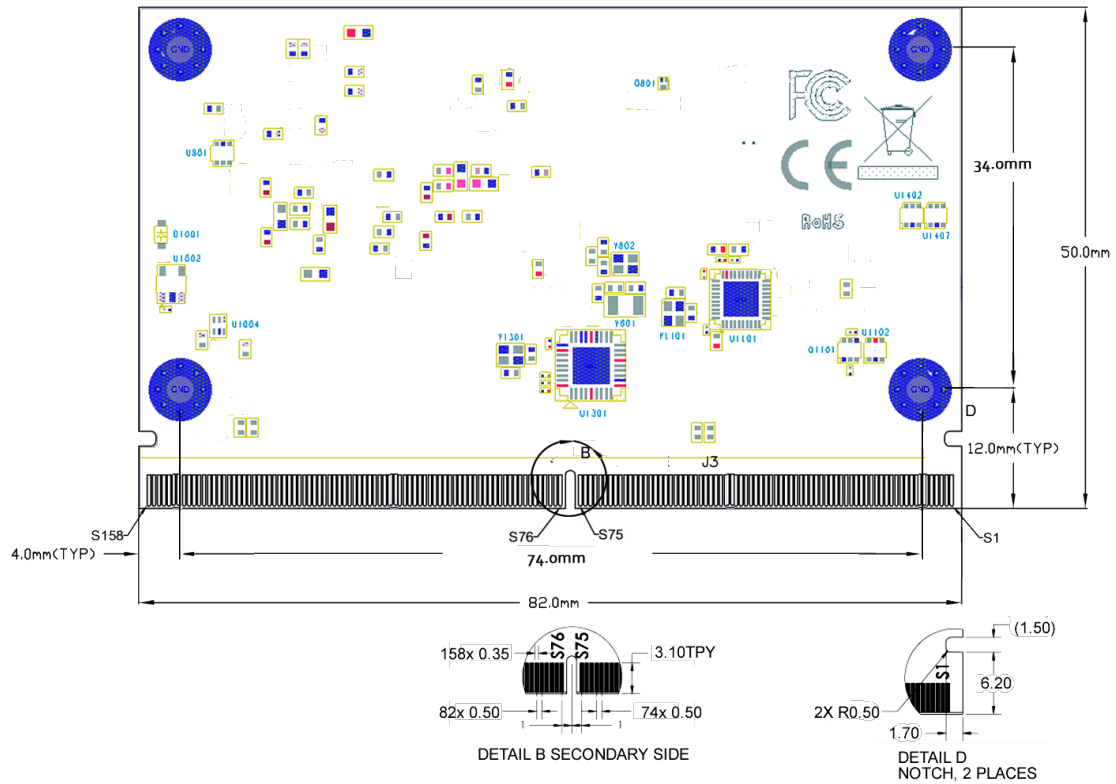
SMARC-iMX93 Mechanical Drawings (Top View)
